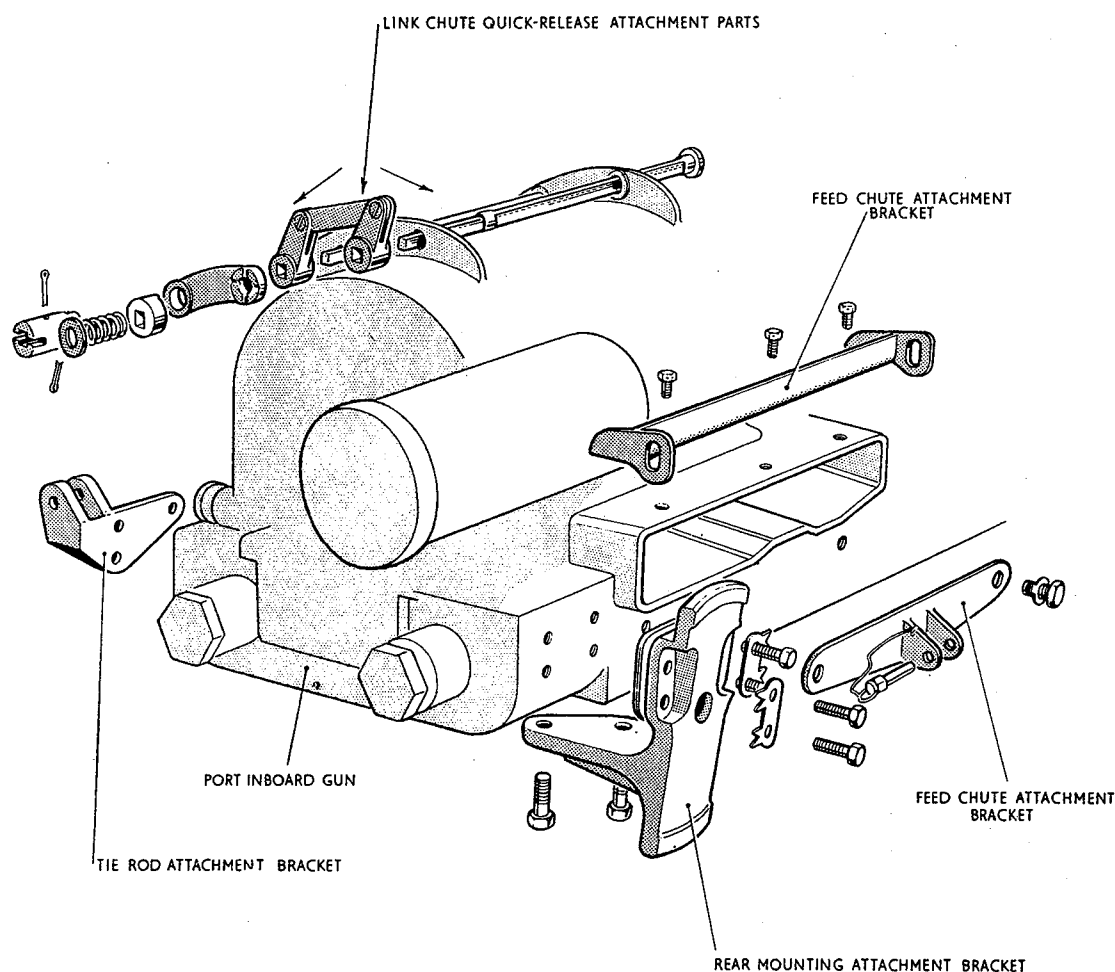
Feed and link chute attachments, and mounting attachments for port inboard gun, dismantled
